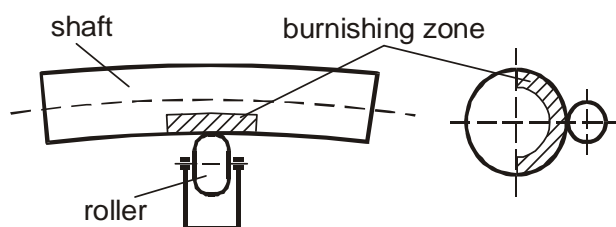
Scheme of method straightening of shafts, non-uniform burnishing
